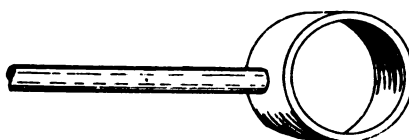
A BAND ON THE END OF THE ROD INSTEAD OF A CLAMP
